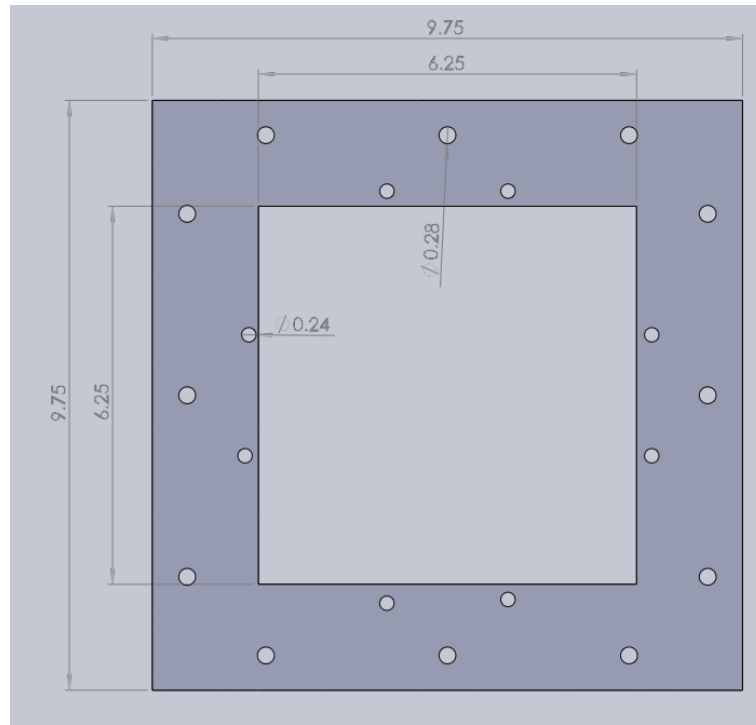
Flange of Wide Angle Diffuser Inlet
